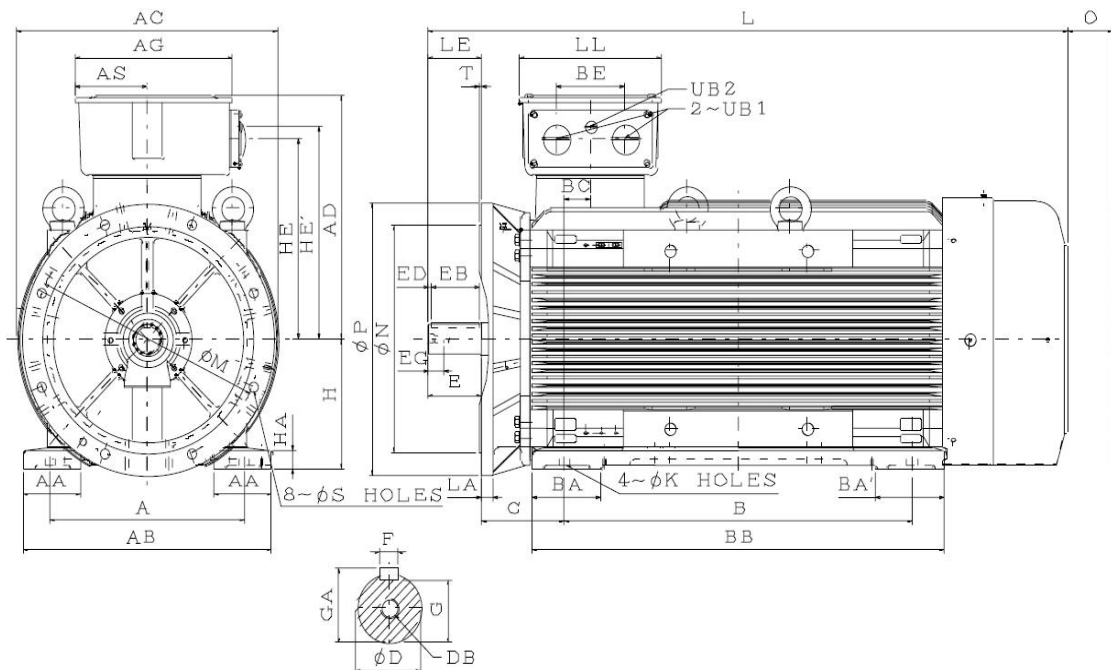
Outline drawing of cast iron design, mounting B35; frame size 315D
